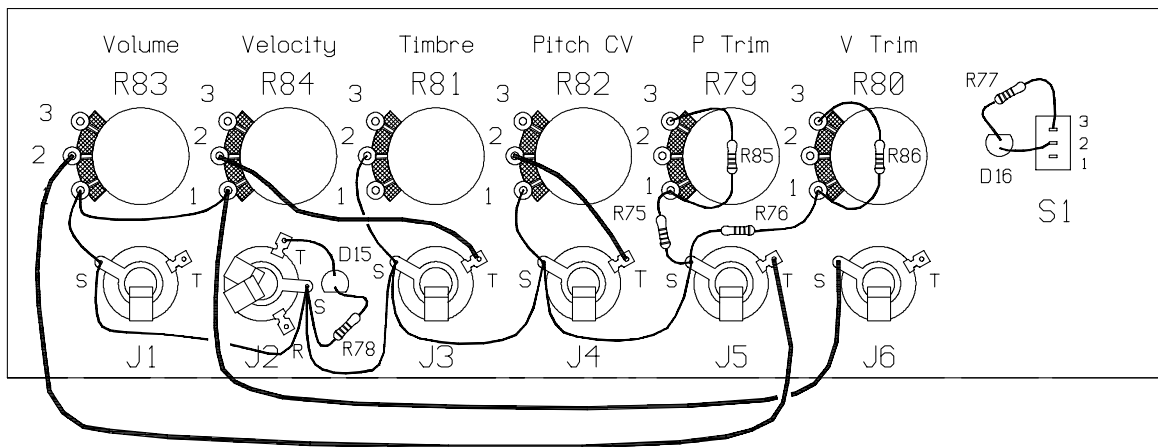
Bare wire and #22 insulated, stranded wire are used to make connections between front panel controls, jacks and switches. Note the resistors and LEDs that mount directly to solder lugs.
